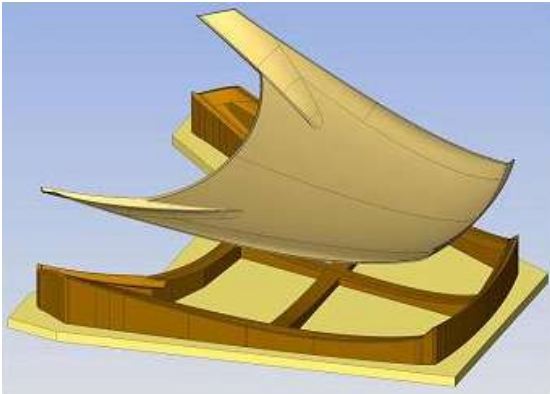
CAD model showing HPPC outer skin and clamp-frame for edge trimming by a CNC router (image courtesy of RangerPlast).
